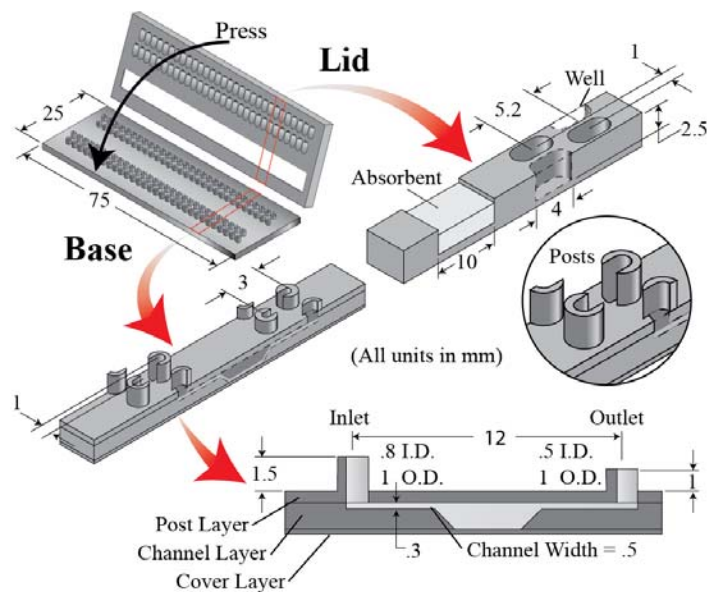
A dimensioned schematic of the KOALA-HD platform (all units in mm)
